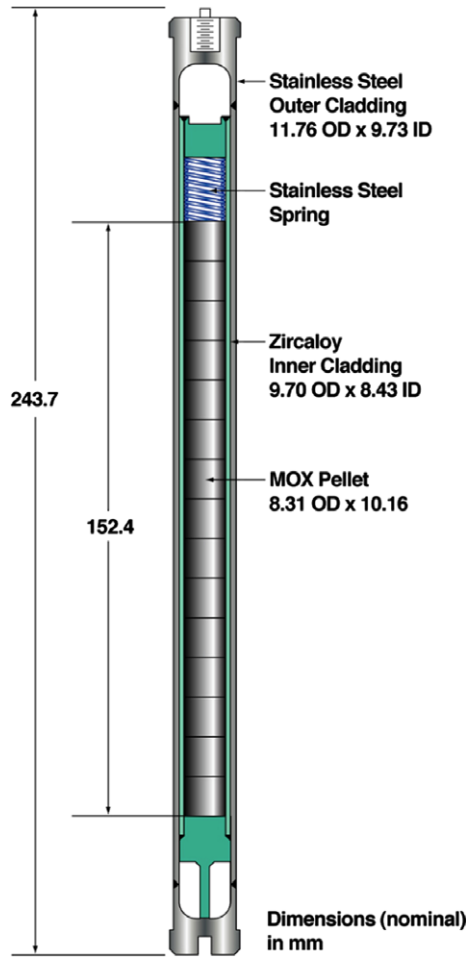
Each capsule assembly contains one Zircaloy fuel pin with 15 fuel pellets.
